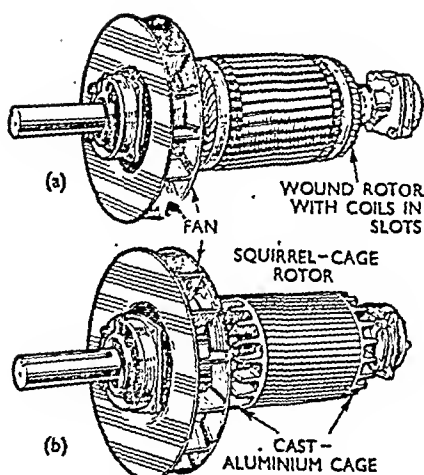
(a) Wound rotor of slip-ring motor. (b) Squirrel-cage rotor with cast-aluminium cage. The stator for each is identical in all respects.
